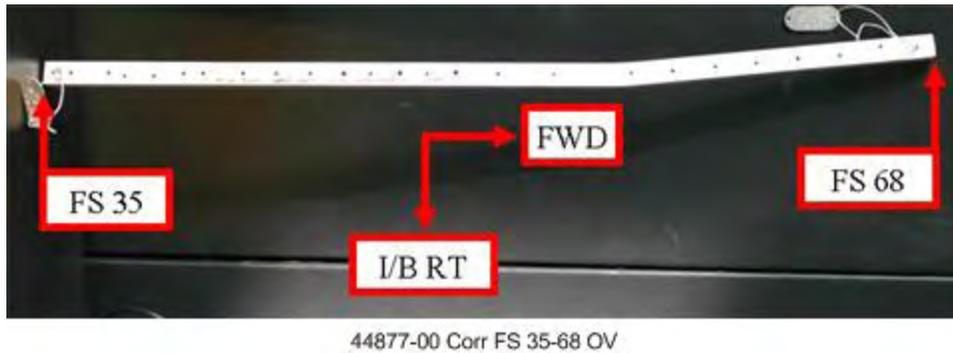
Overview of Fuselage Upper Left Angle 2 Beam Assembly FS 35 Through FS 68
